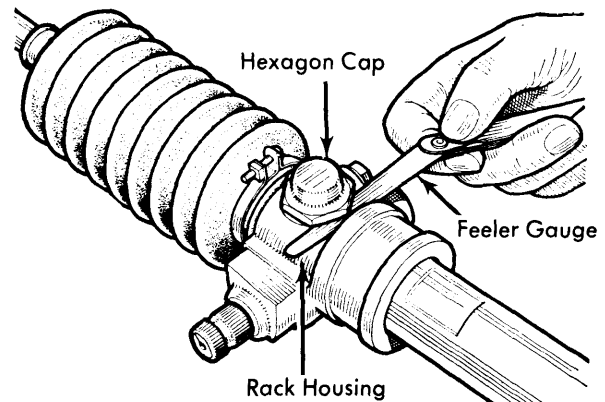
Using a Feeler Gauge to Check Rack Damper Clearance
